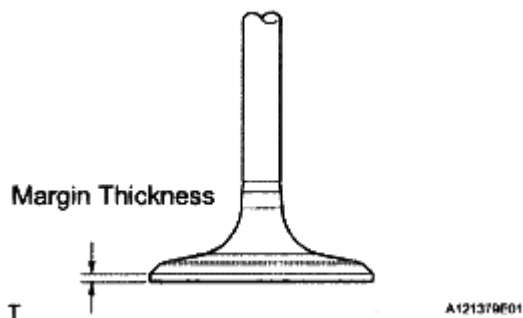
Measuring Valve Head Margin Thickness Using Vernier Calipers
